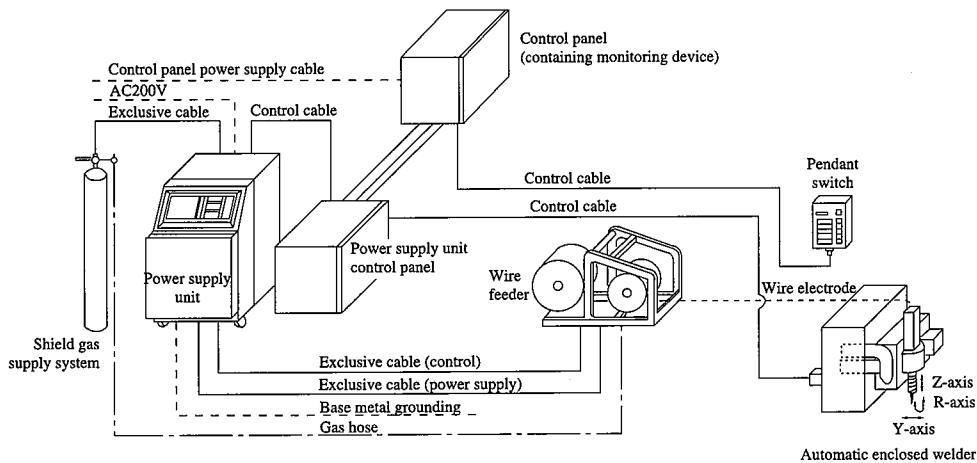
Equipment configuration example of automatic enclosed welder
